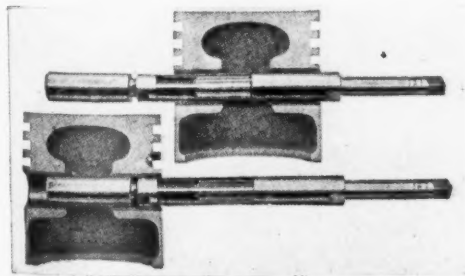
Bottom. Cutter entering first bushing. Top. Entering second bushing guided by rear pilot
